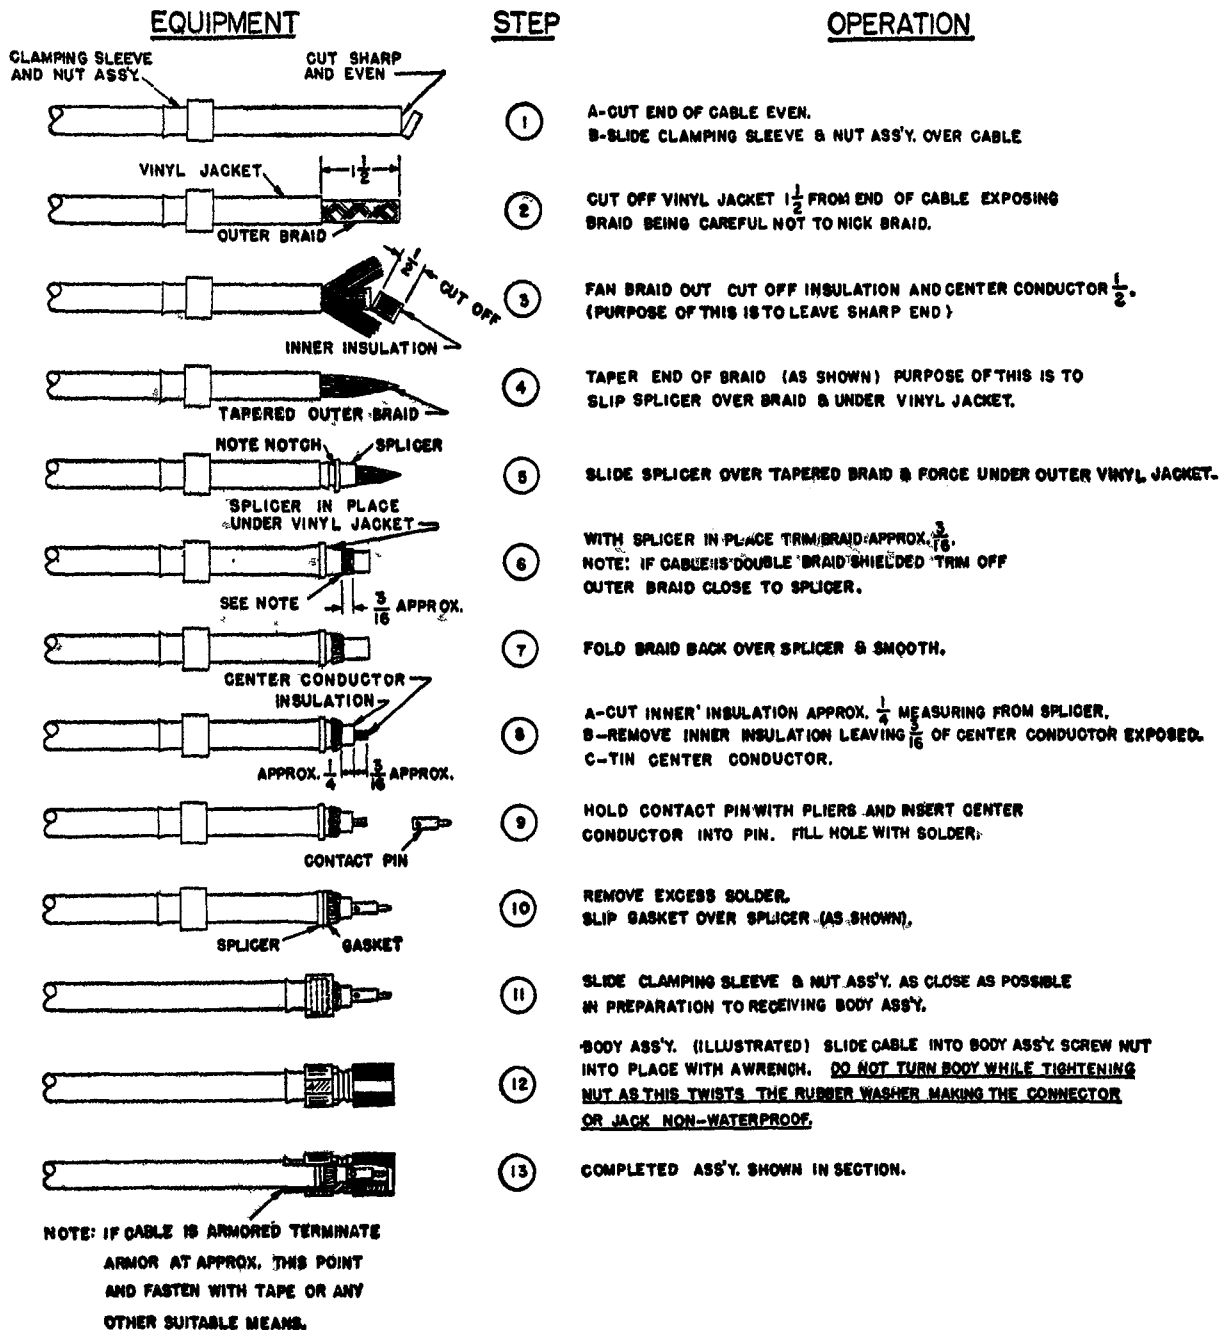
Coaxial Cable Fabrication Instructions for Use With Plug UG-21/U
